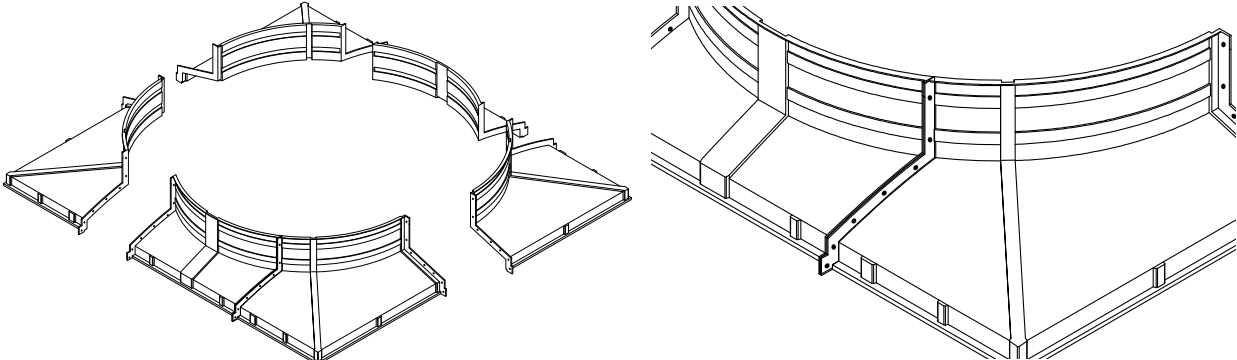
Assemble of the Fan Deck sections of an RTGMTC module.
